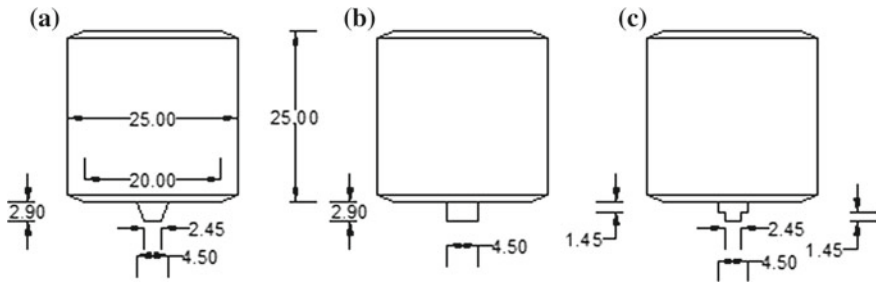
Dimensions of different pin profiles, a tapered cylindrical pin, b straight cylindrical pin, and c stepped cylindrical pin (all dimensions in mm and not to scale)
